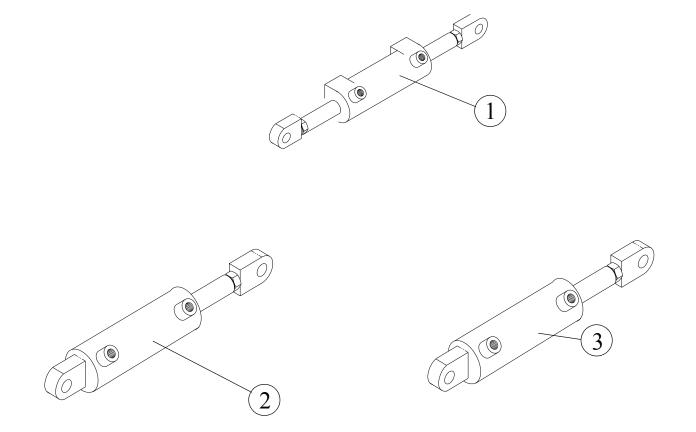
Hydraulic cylinder components of SL26/30SL
